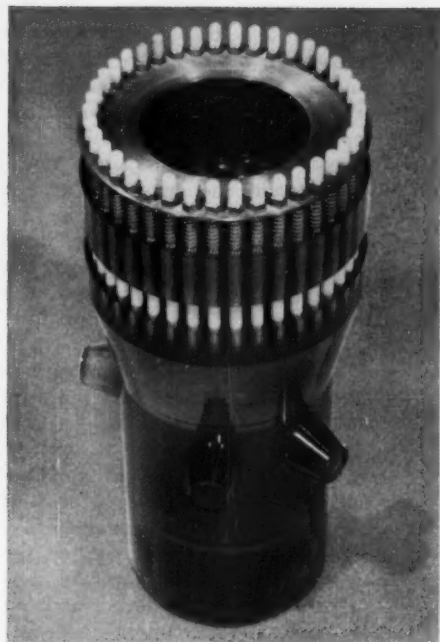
Assembled pressure vessel prior to testing. Major parts of the vessel are cemented together with a room-temperature-setting resin adhesive.
